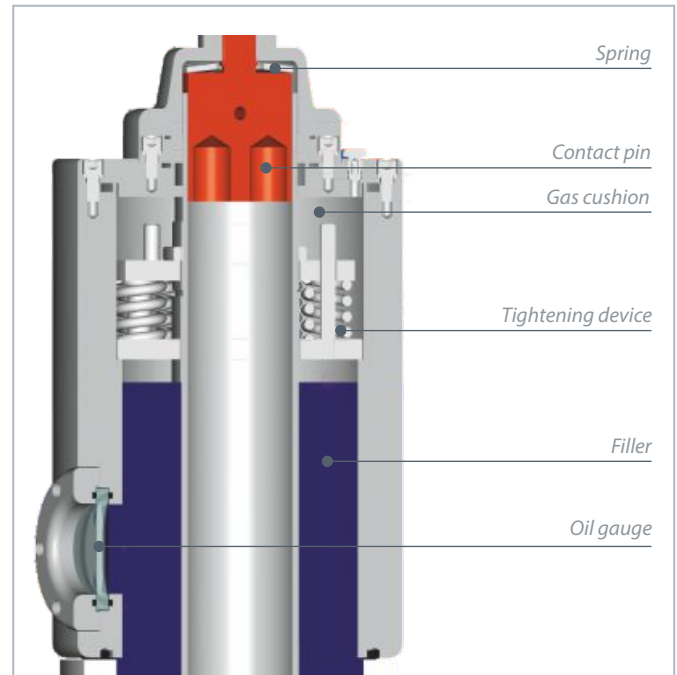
Upper part of 220 kV and higher bushings with RIP insulation and liquid filler
